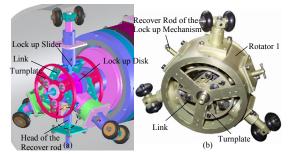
The Lock up mechanism. (a) Basic structure. (b) Real picture.
